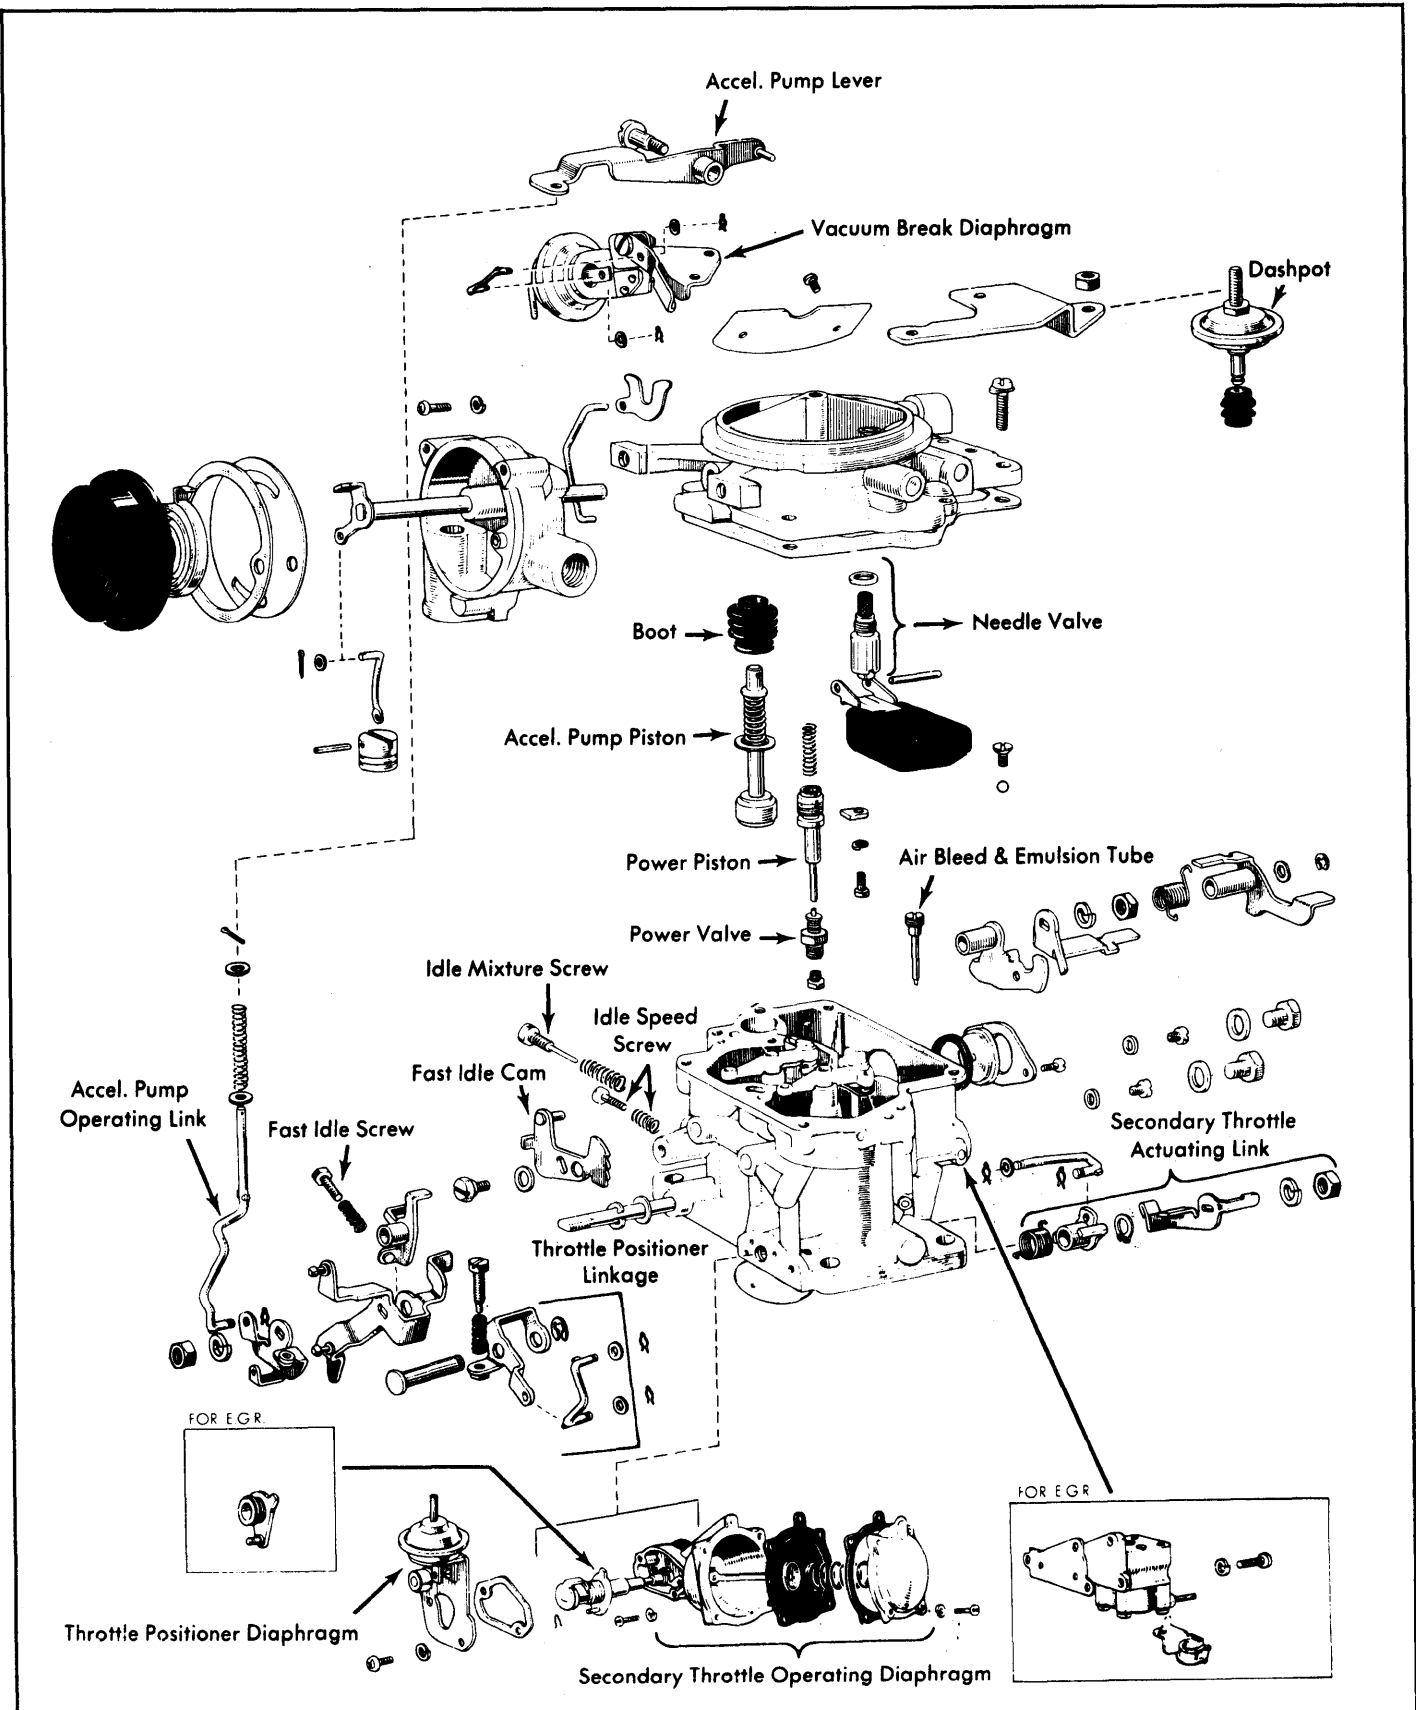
Exploded View of Aisan 2-Barrel Carburetor (1974 Toyota 4M Engine)
